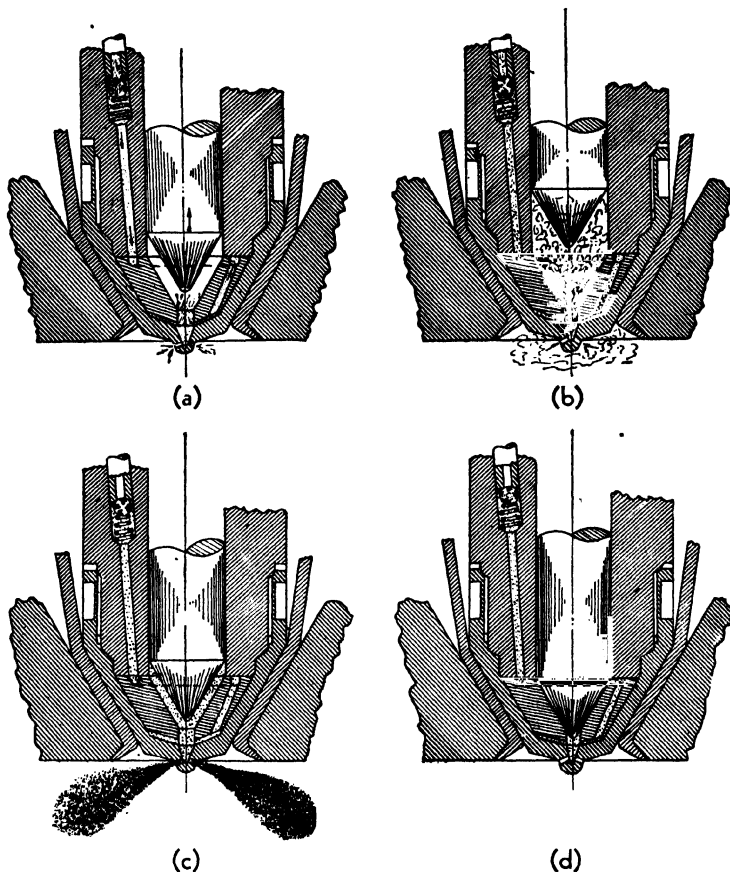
Cummins Diesel injector operation. (a) Fuel check valve open. Plunger moving up and fuel entering plunger chamber. (b) Plunger at top position. Check valve closed. Correct amount of fuel in plunger chamber, hot air from compression being forced through fuel charge. (c) Plunger moving down, driving gasified fuel charge into combustion chamber. (d) Plunger seated and injection finished.
